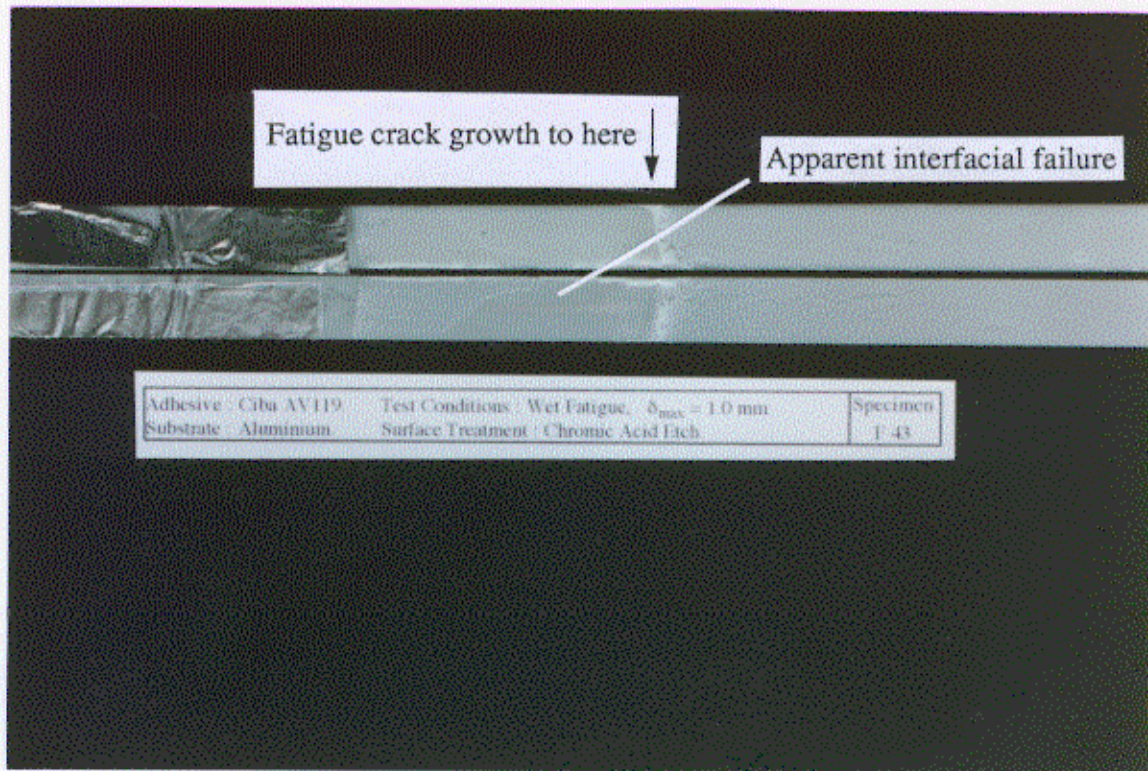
Fracture surface of CAE aluminium specimen bonded with 'AV119', tested 'wet', showing apparent interfacial failure.
